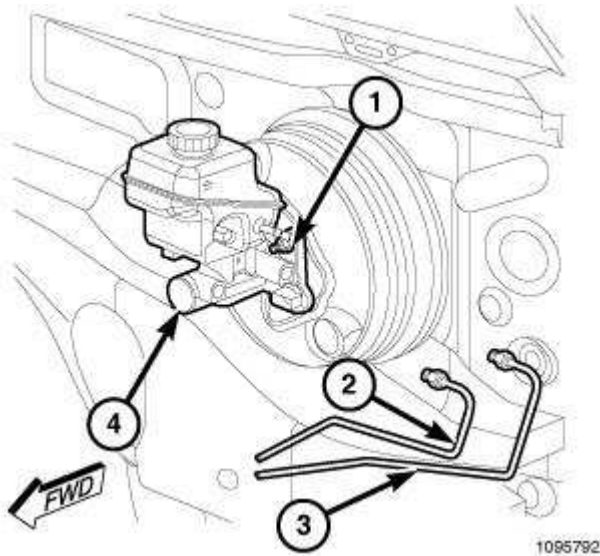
BRAKE TUBES AT MASTER CYLINDER
